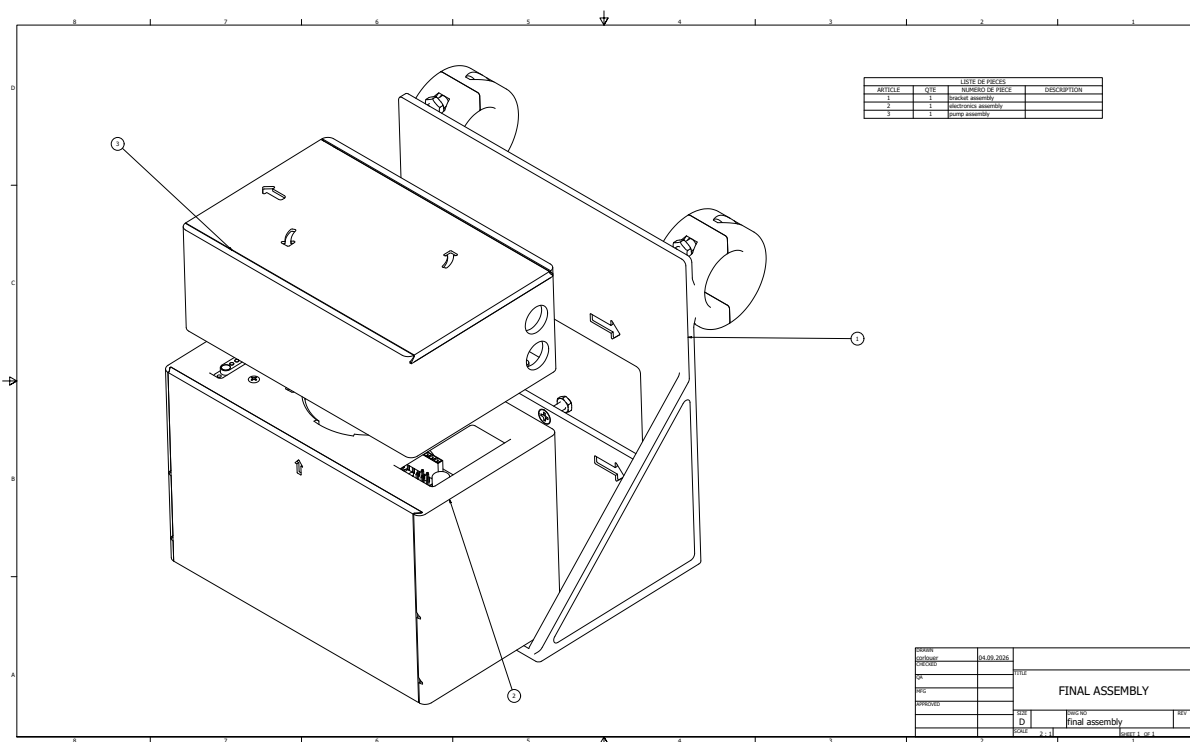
The assembled electronics and pump boxes, mounted under the wheelchair seat.
